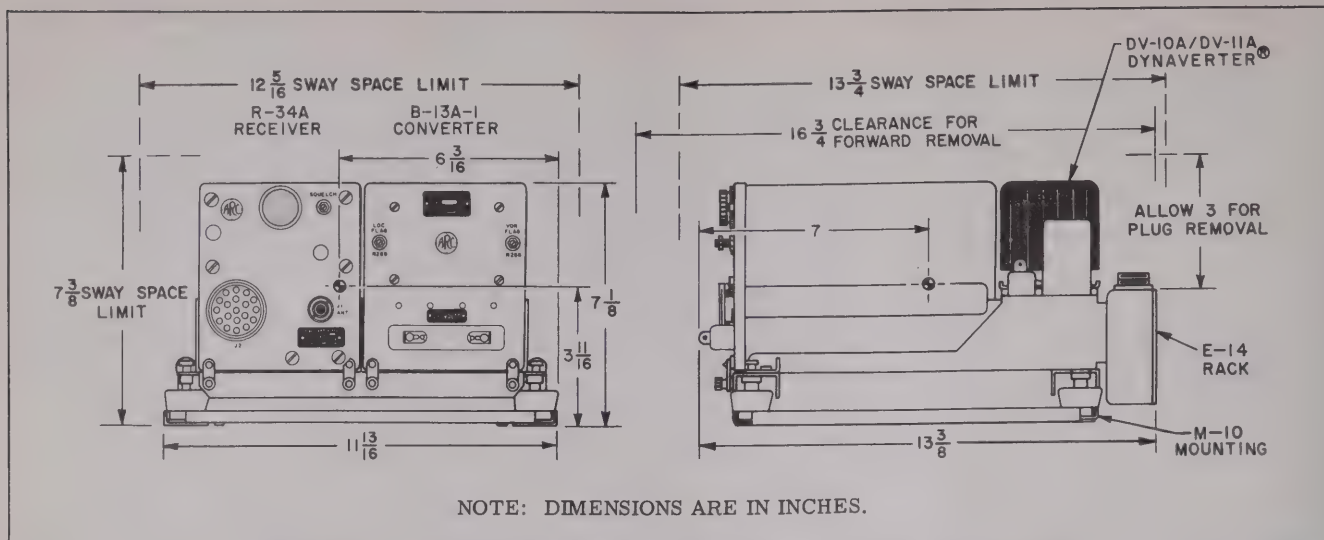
E-14 Rack and M-10 Mounting, Installation Dimensions
